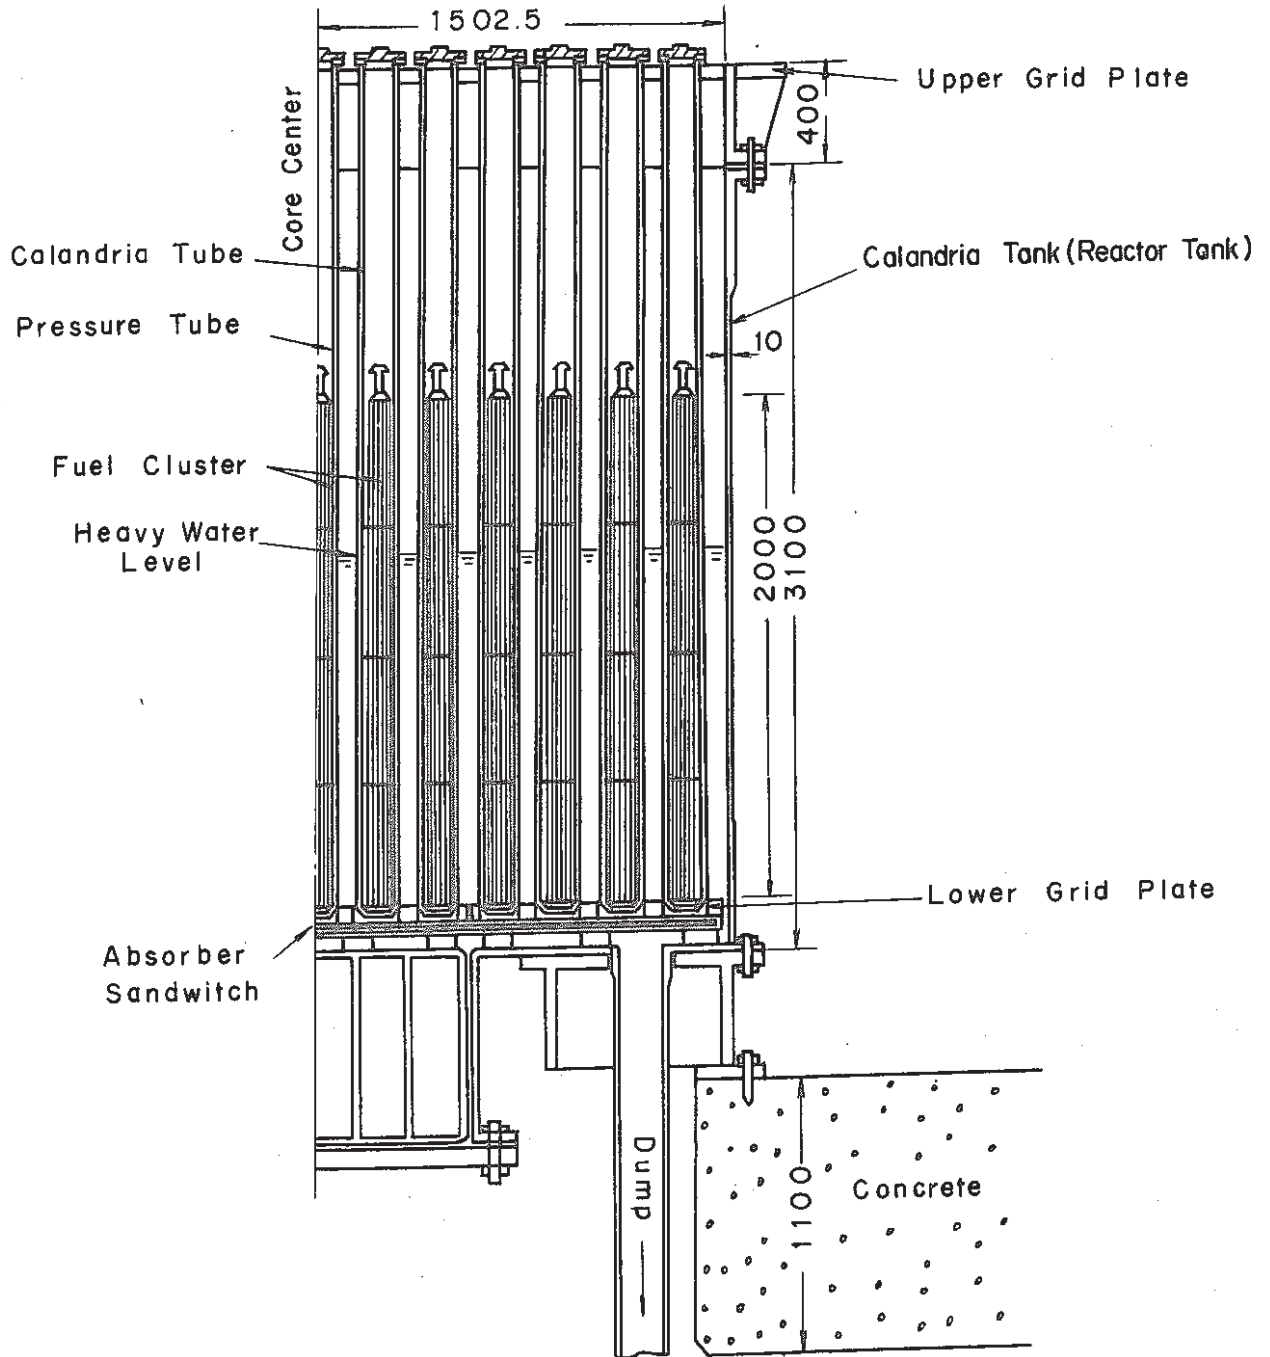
Schematic drawing of the core configuration of Deuterium Critical Assembly (DCA)
